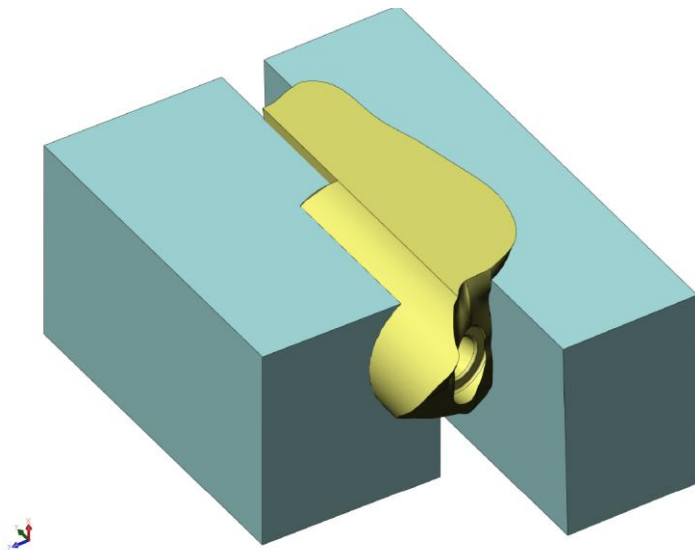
Final assembly of the part-implant clamping from a different angle, showing the flat surfaces that will come in contact with the vice's clamping jaws.
